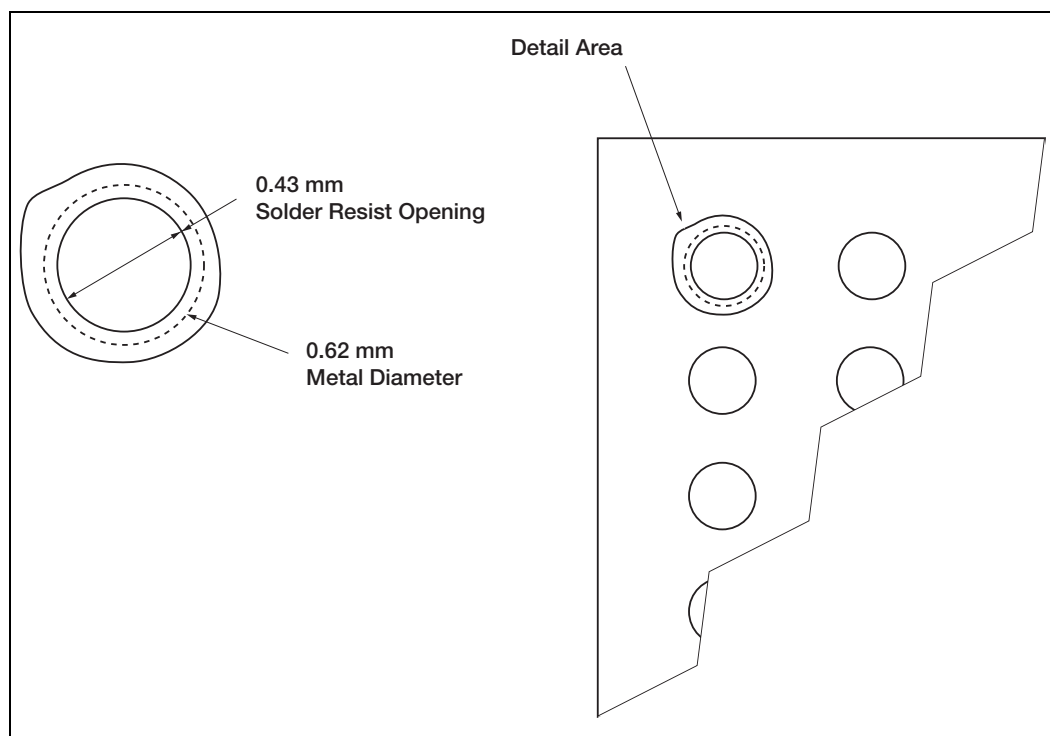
82571EB/82572EI Controller FC-BGA Package Ball Pad Dimensions
